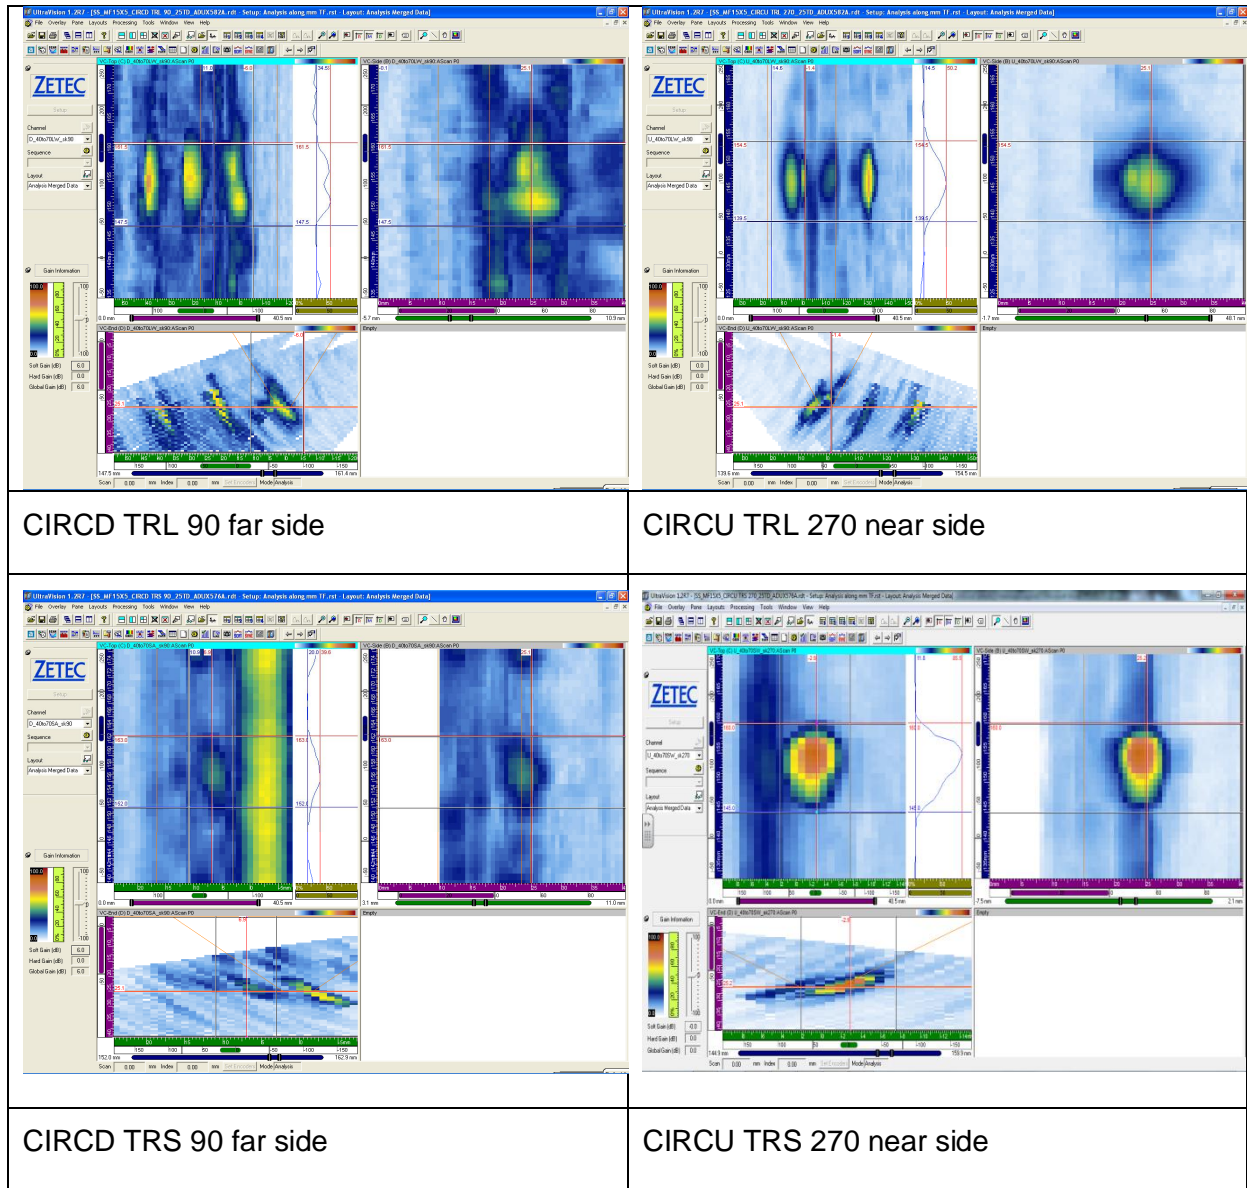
Screen captures of defect MF15X5 B inspected with technique PA-1.
